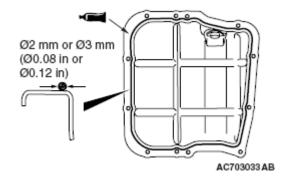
Applying Bead Of Sealant To Mating Surface Of Engine Lower Oil Pan
